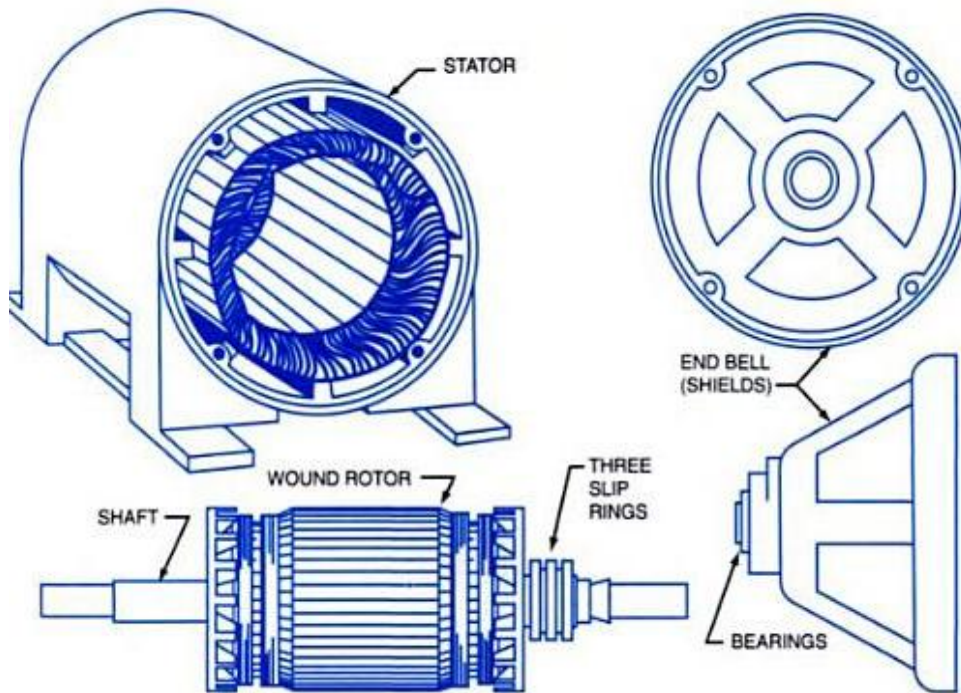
Parts of Wound-Rotor motor (Walter, 2001)
